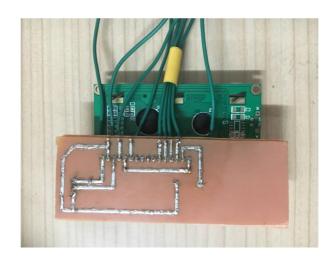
Back View of the PCB of LCD Circuit (soldered components)
